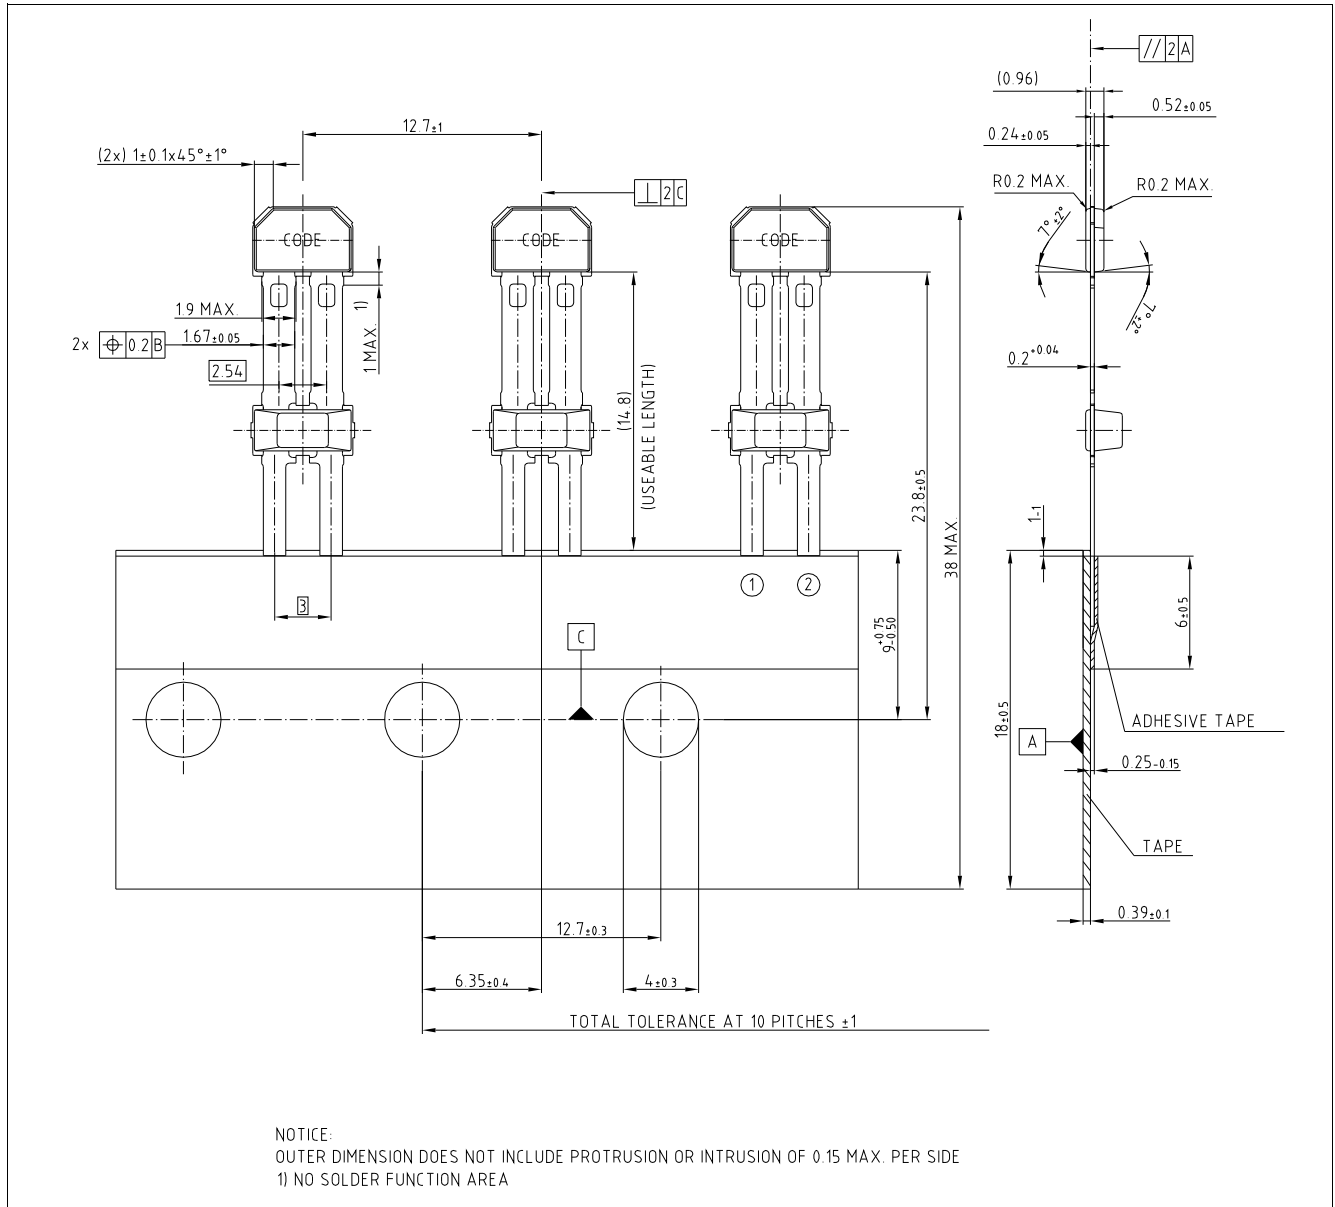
Packing Dimensions in mm of PG-SSO-2-53 (Plastic Single Small Outline Package)
